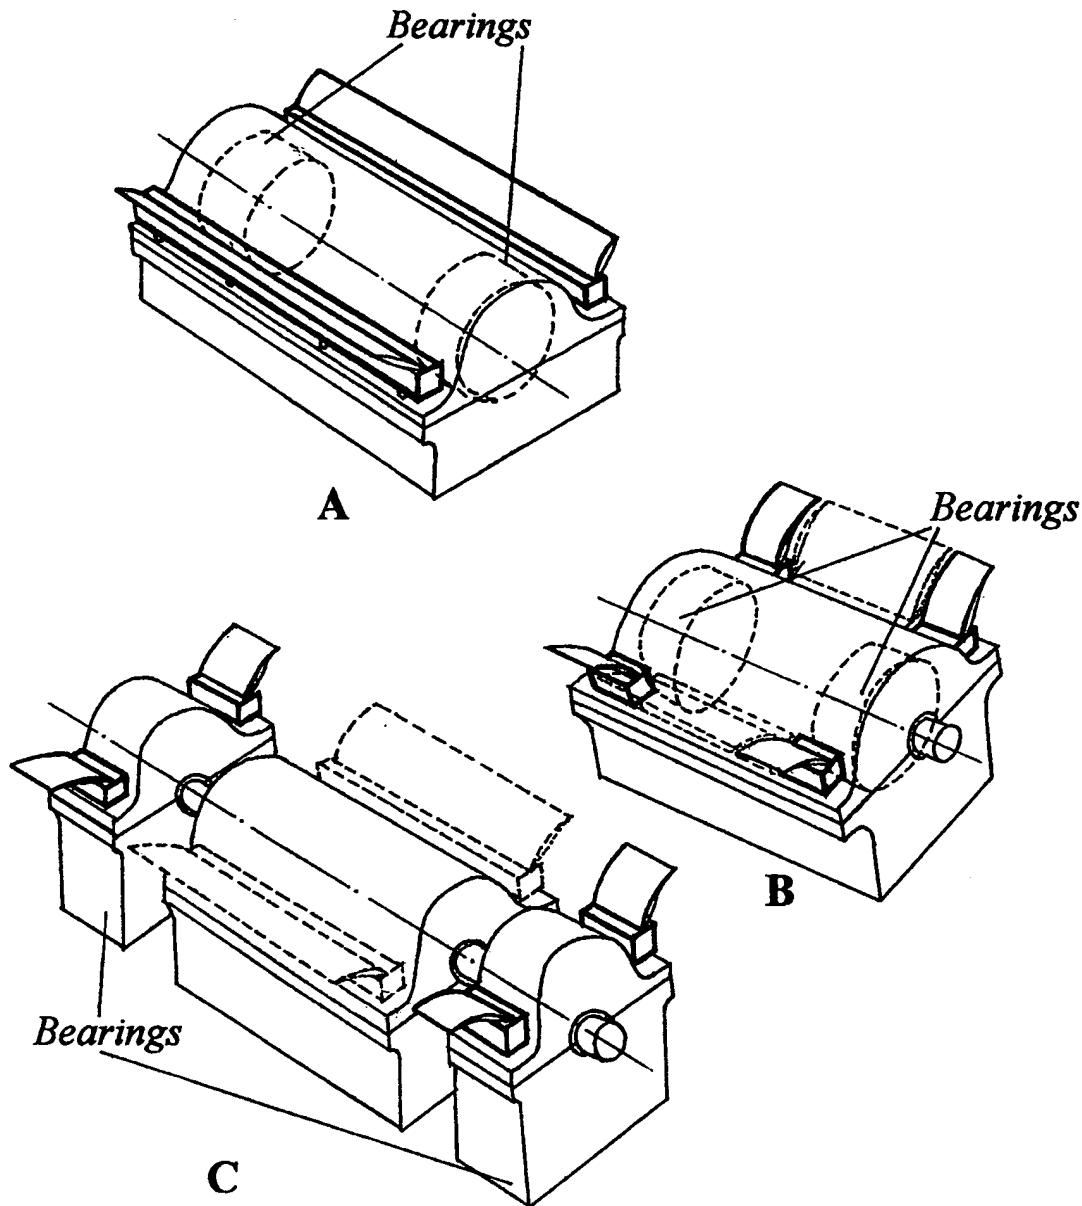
Correlations A' and B' -- in mutual dimensions and constructions -- between bearings and their related rotor cylinder for which the method of removal of vibrations may be used so, that the B-F-L-Ws will be installed already upon whole rotor cylinder.
